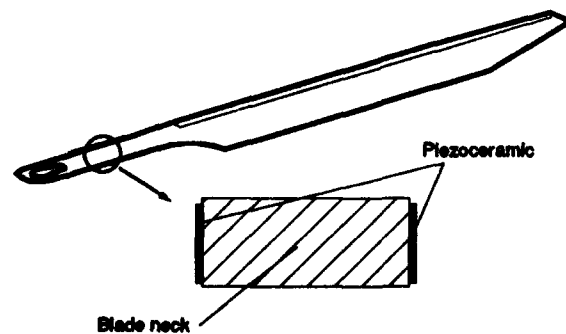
Rotor blade with piezoceramic lead-lag bending actuator
